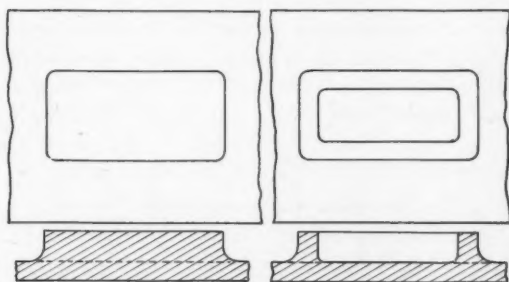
POOR (LEFT) AND GOOD (RIGHT) DESIGN FOR BOLTING PLATES OR PADS.
